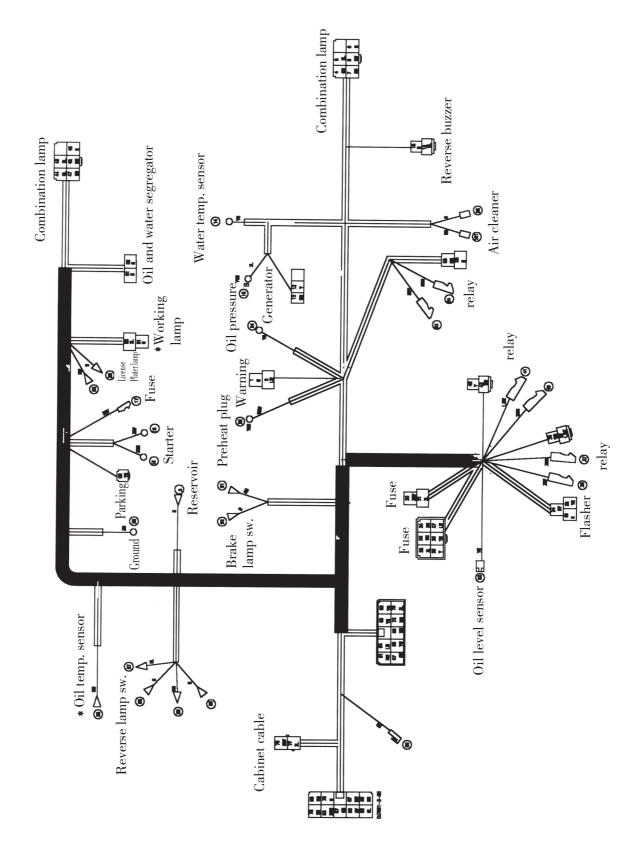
Engine wire harness. CPCD50-70-Xs -41-
